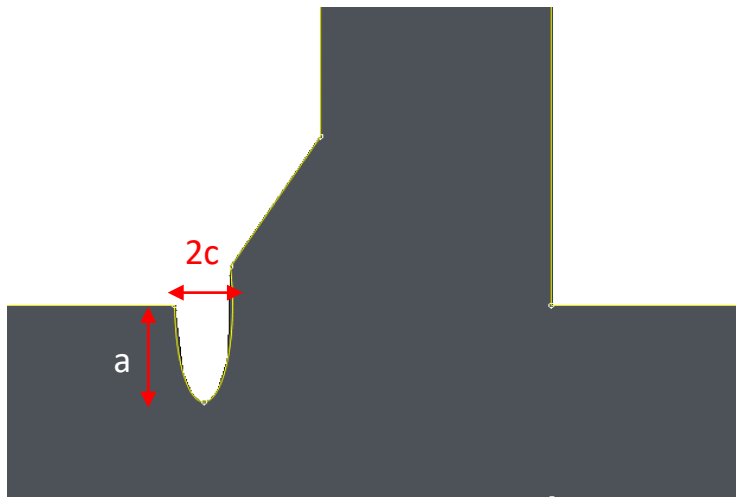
Idealised model for a tubular member welded to a base plate of 8 mm thickness.
